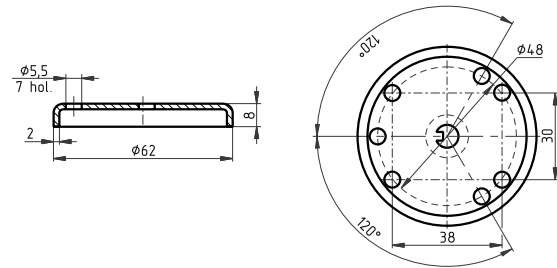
Overall and connecting dimensions of the external Operator console of BI04.43-1
